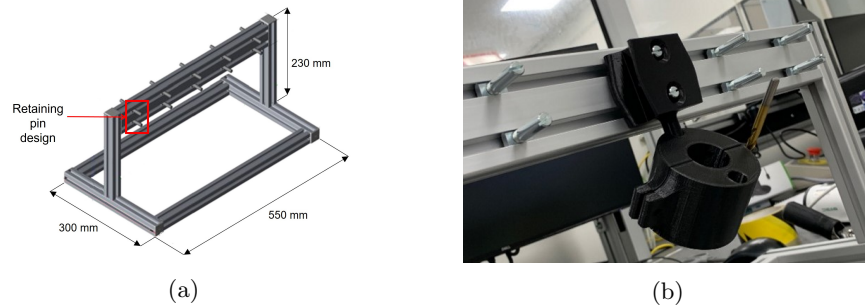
Tool rack design (a) and a photo showing a remote-handling grip hosted at a tool rack (b).
